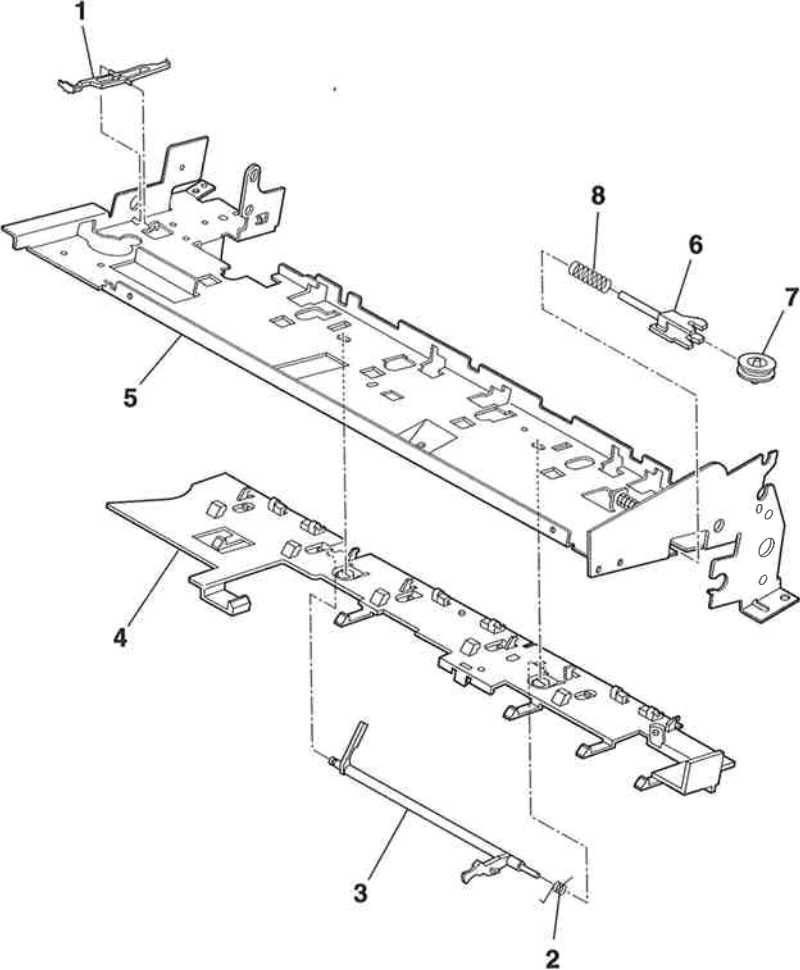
CARRIAGE GUIDE & PRESSUER PLATE
